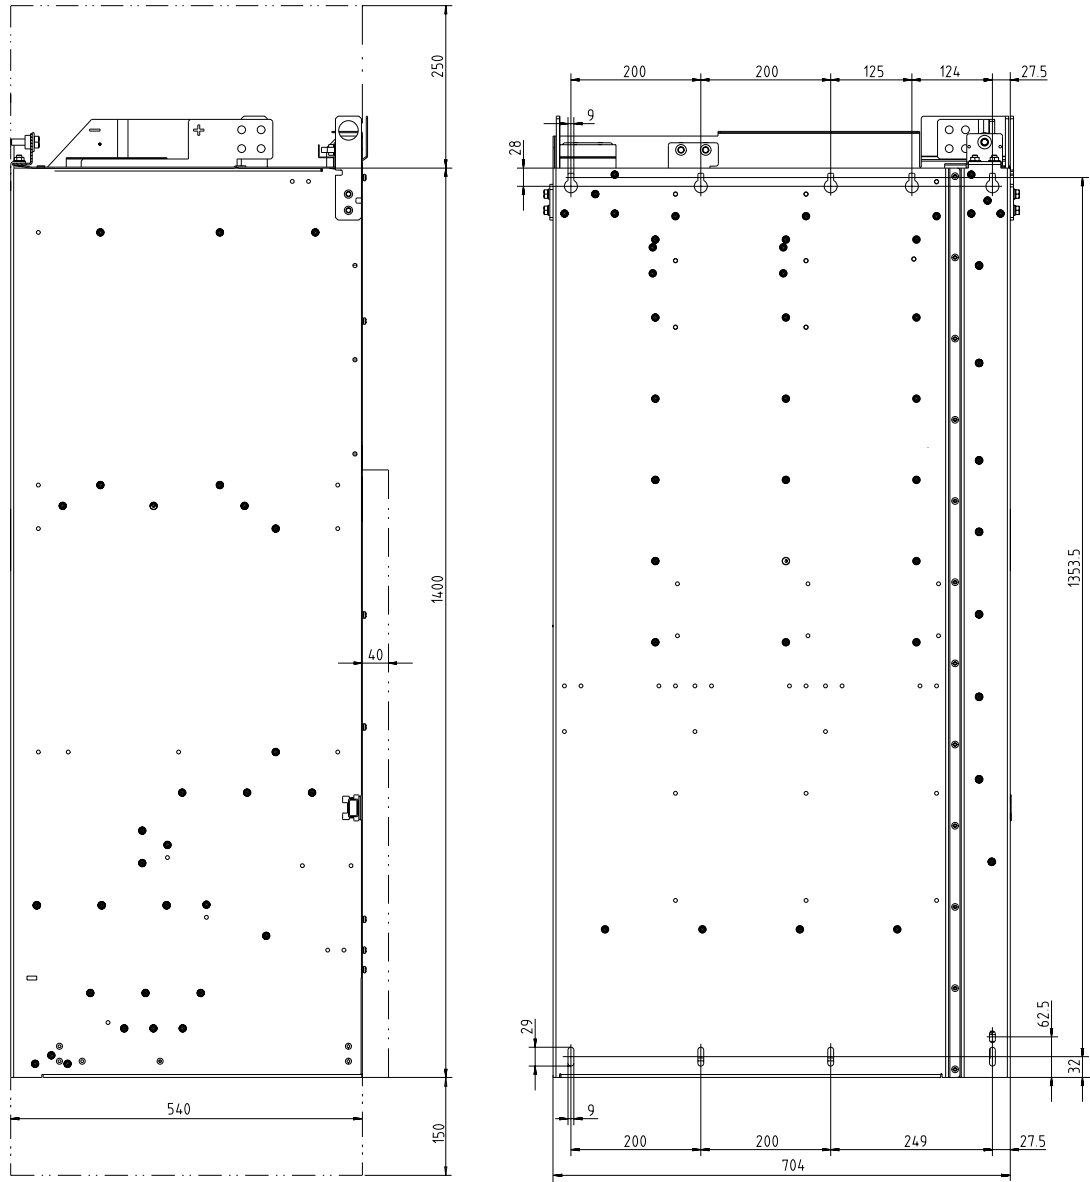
Dimension drawing Smart Line Module, frame size JX Side view, rear view
